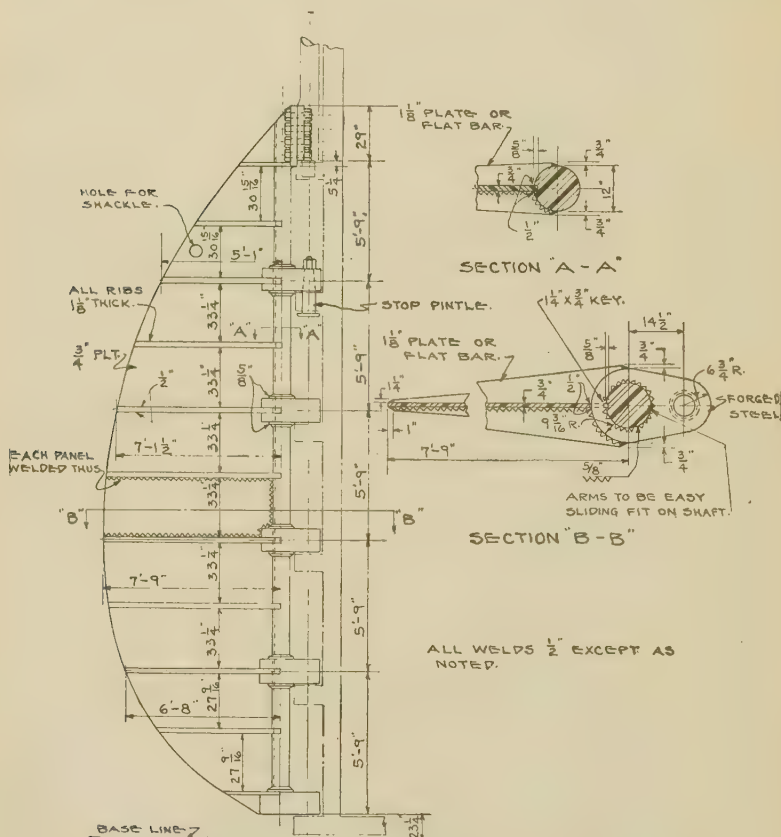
Welded rudder for 12,720-ton dead-weight freighter.
